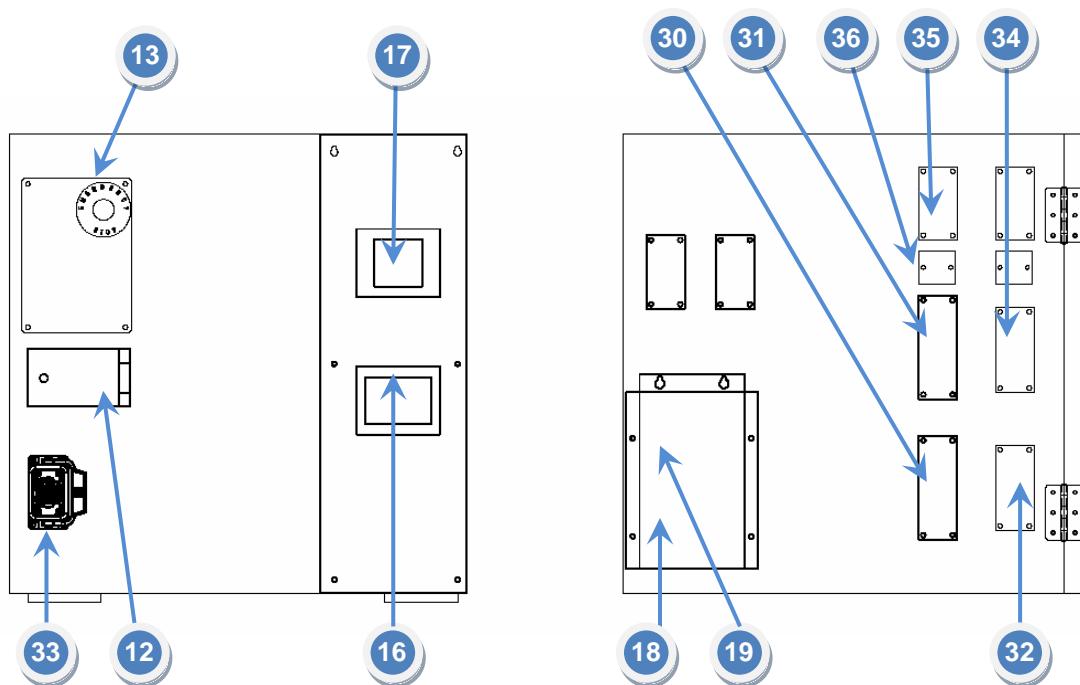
Part arrangement in the front and rear surfaces of the Hi5-C20 controller
